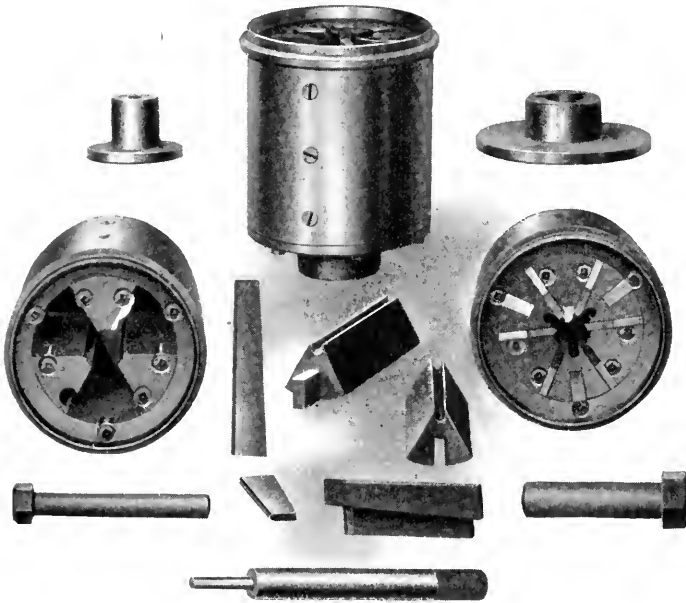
CUTTER HEAD AND ATTACHMENTS
